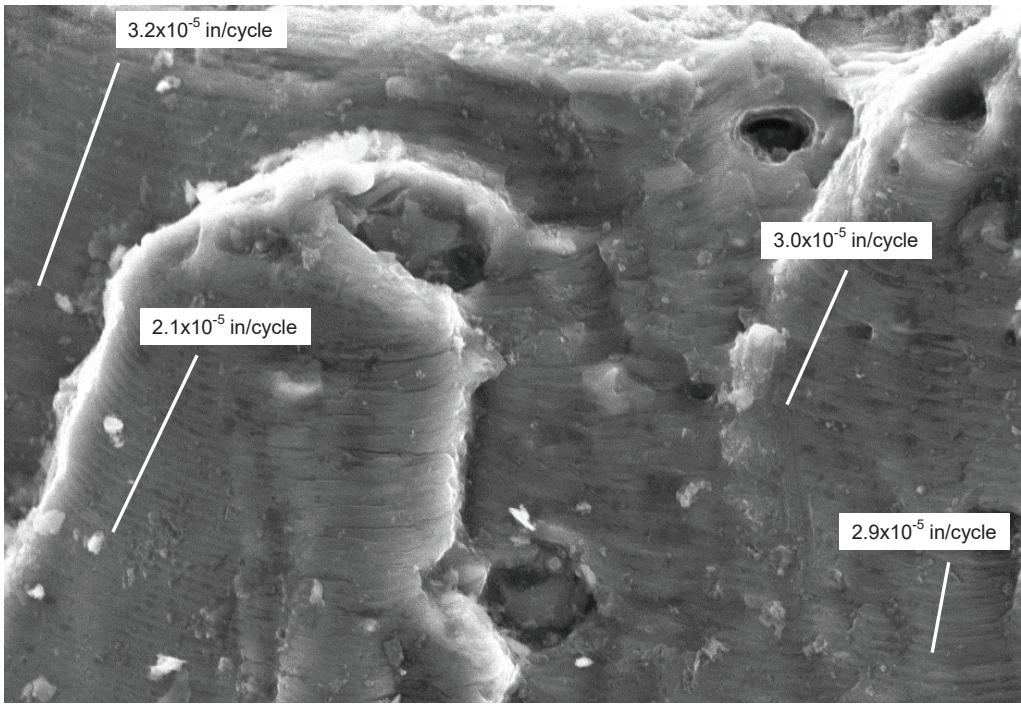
Fracture surface of the AF+LEFM test UL-P0-03 (LEFM: -30,000 psi to 30,000 psi).
